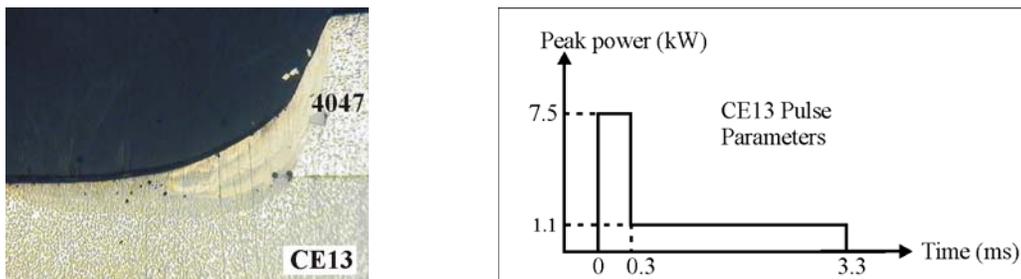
Cross section of CE13 weld with the pulse shape used.
